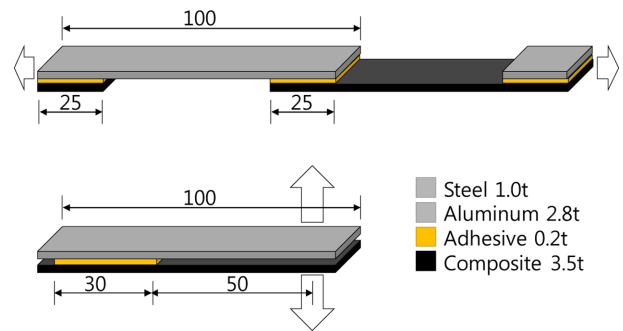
Dimensions of metal-composite hybrid adhesive joints for (upper) lap shear tests and (lower) cleavage peel tests
